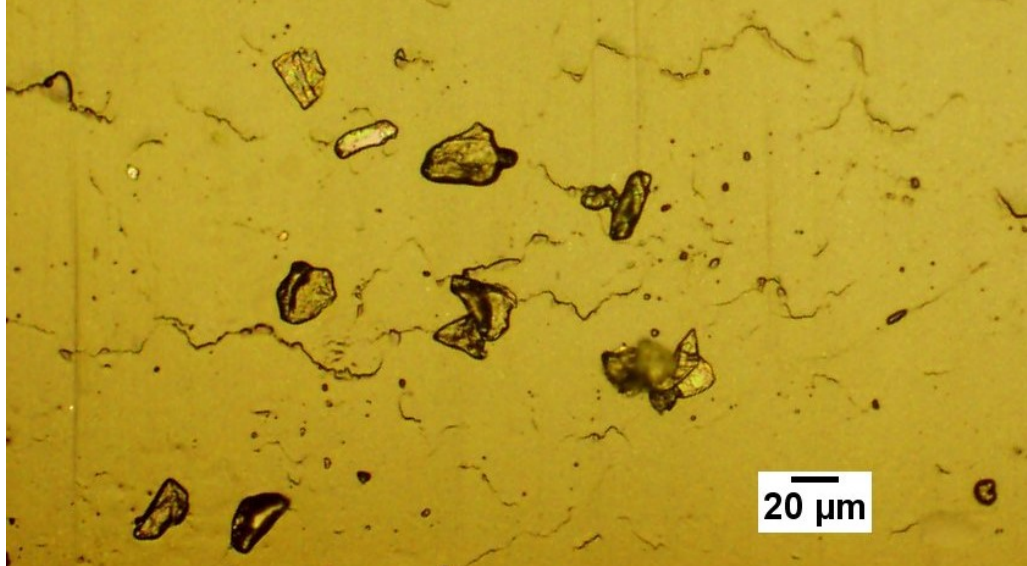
Small pits and cracks on the addendum of the driven gear tooth 2.
